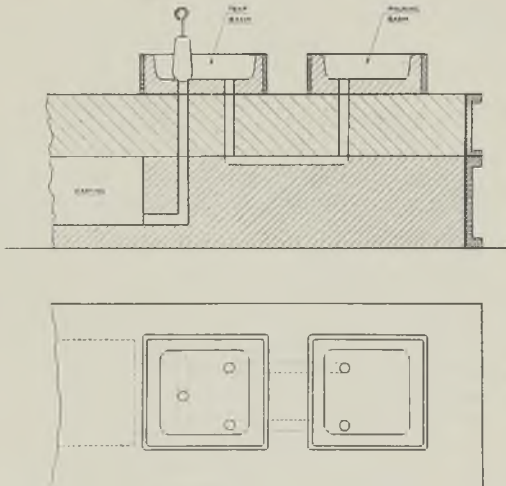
TRAP RUNNERS FOR MACHINE-TOOL BED.
